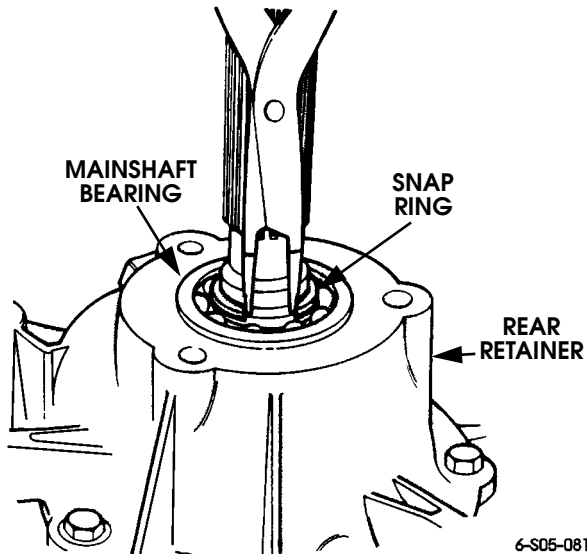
Rear Retainer and Mainshaft Bearing Snap Ring Installation
